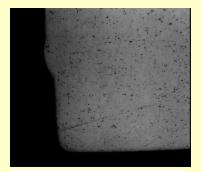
Bulge found in Sabot No. 72B outside wall, 40x.
